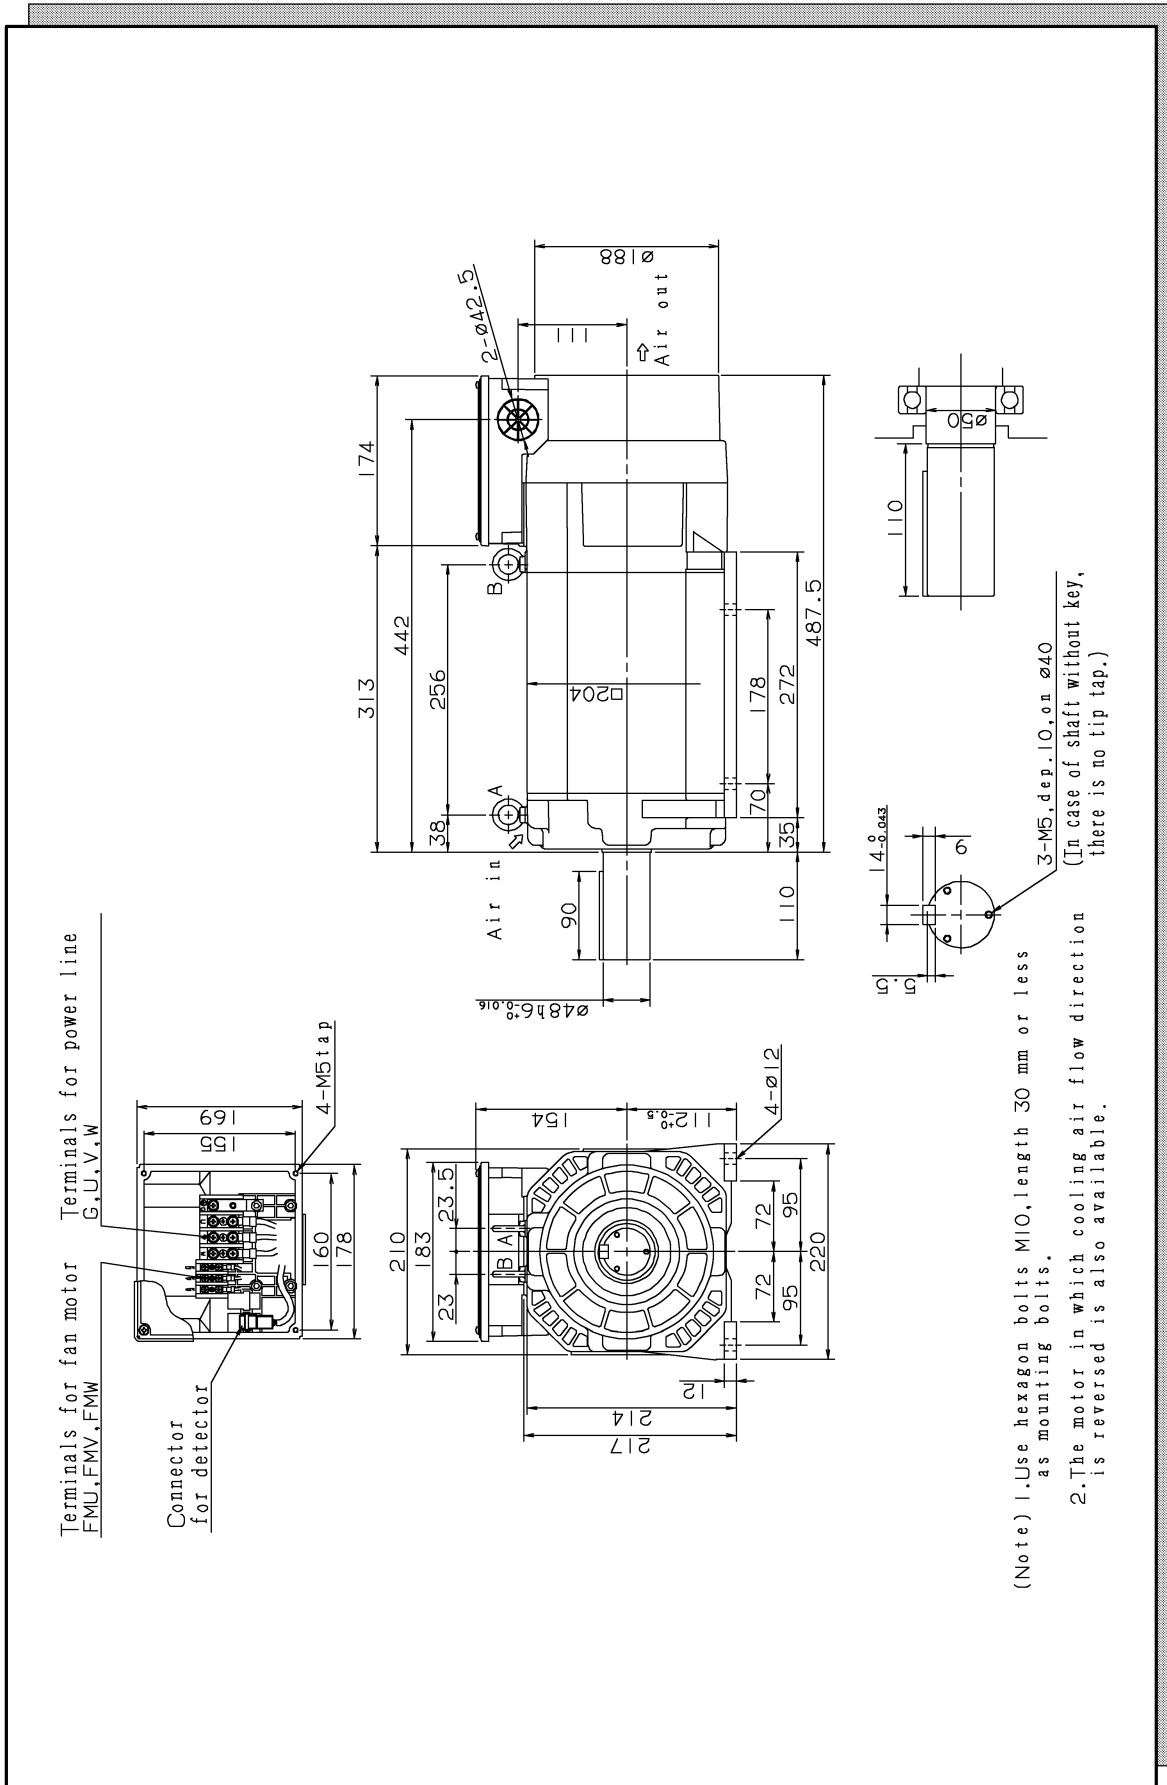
(e) Model α 12HV, α 15HV (Flange mounting type)
